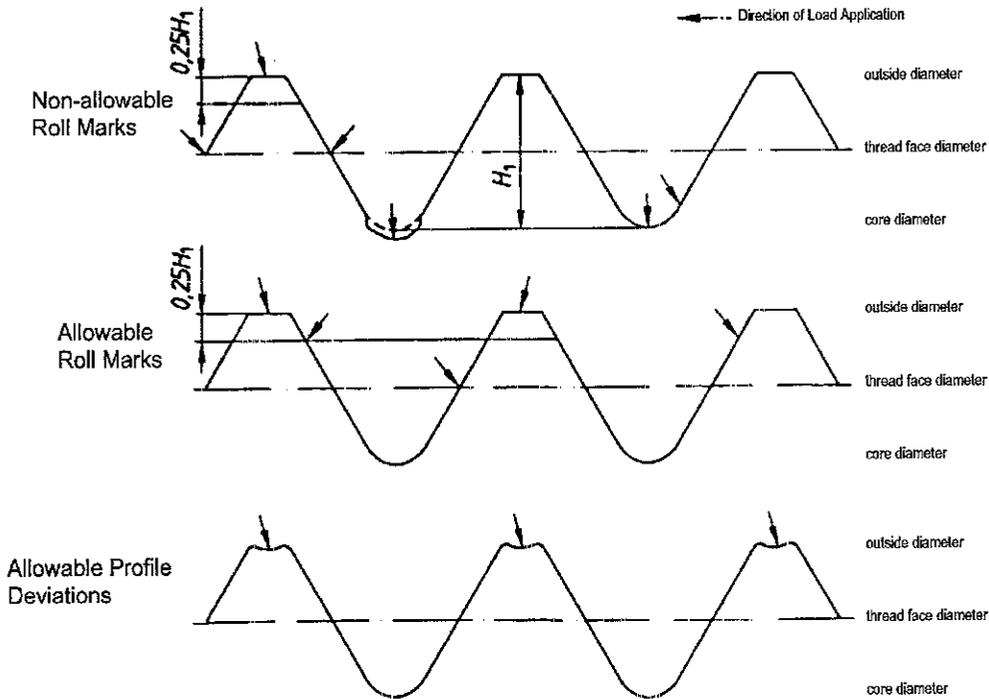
Appearance, shapes and locations of flaws in bolts and nuts
